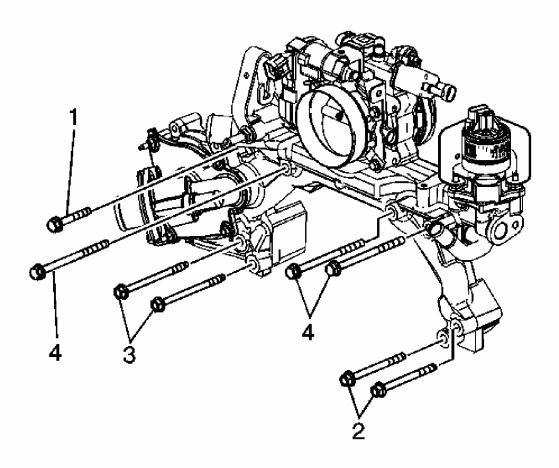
Idebtifying Water Pump Housing & Bolts Courtesy of GENERAL MOTORS CORP.
